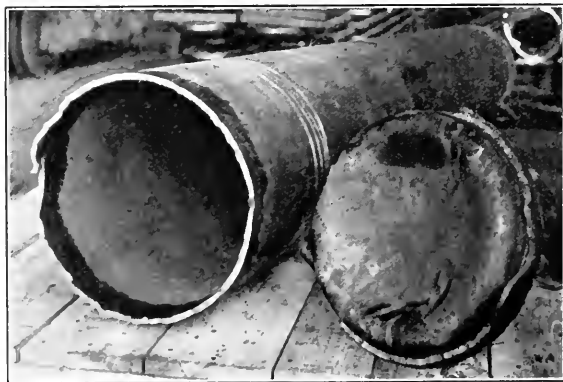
SPECIMEN NO. 2 (GAS WELDED) SHOWING FRACTURE AND INNER SIDE OF REVERSED HEAD
